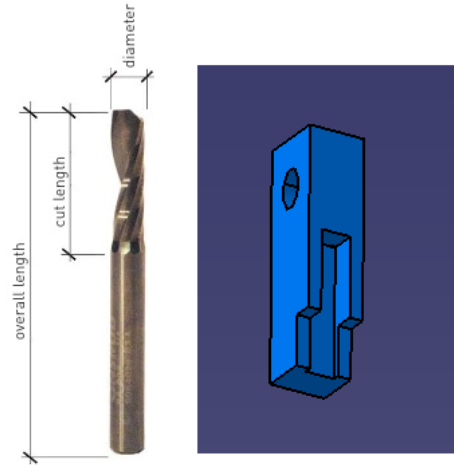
On the left a milling tool with the usable length and Diameter of operation. On the right the CAD design for the PVC component.
